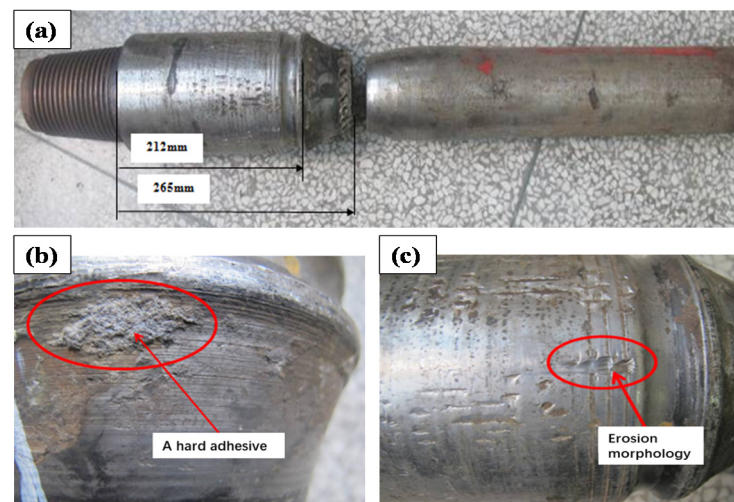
Macro morphology of failed drill pipe sample, (a) Macro topography of failed drill pipe; (b) Hard adhesive; (c) Erosion morphology.
